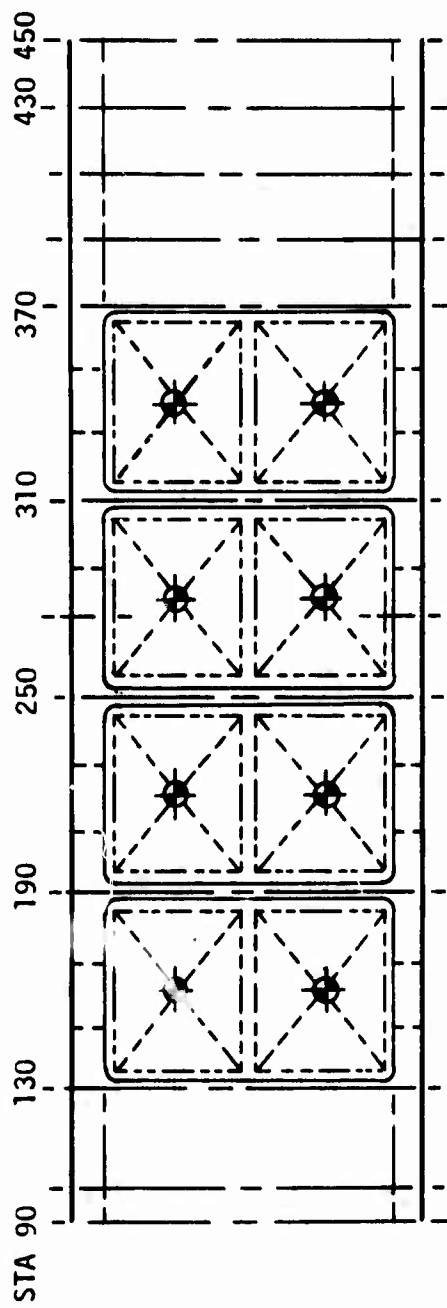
(U) Structural Arrangement for Double Row of Eight 40 x 48 Cargo Pallet Exits.
